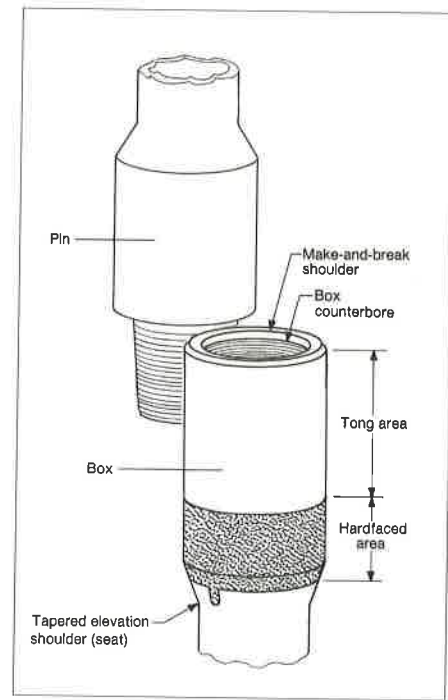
Drillpipe is heavy-walled seamless tubing with tool-joint pin and box-end fittings.
